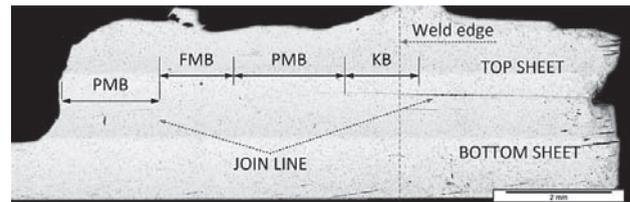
Macrosection and weld bond line with (FSSW at 3 000 rpm, 50 mm/min, 3 s)
